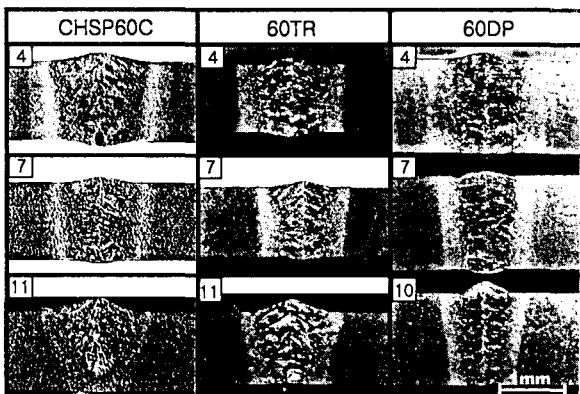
Representative cross-sections of beads with the welding speed under 6kW
